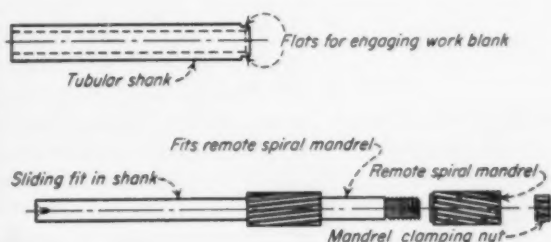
Exploded view of three-piece mandrel used to make zig-zag grid. Two spirally grooved sections are held together by clamping nut.
